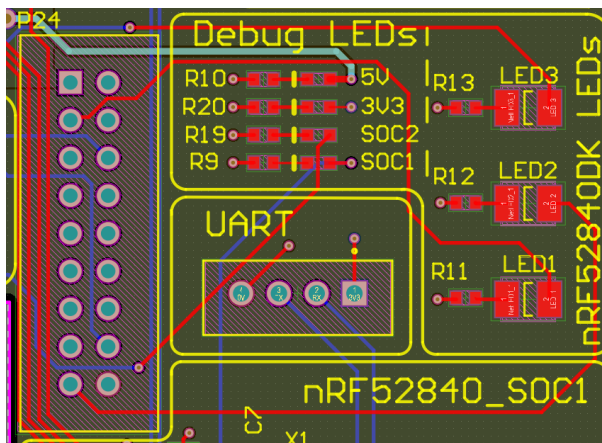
PCB Layout revision 2: Layout around the PCB's LEDs and connector P24
